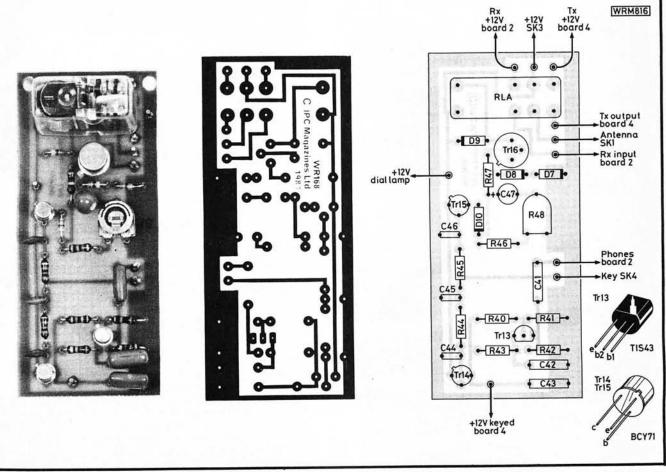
(Above) copper track pattern and component placement for the transmit board shown full size. Fig. 3.5: (Below) the copper track pattern and component placement for the changeover and sidetone board shown full size. The photograph shows a completed sidetone and changeover board
